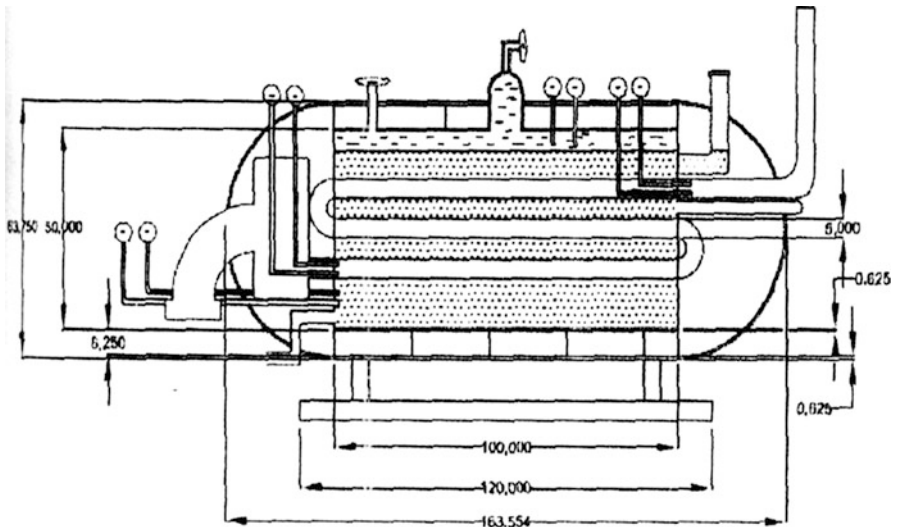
Dimensioned diagrams of the three pass fire-tube boiler
